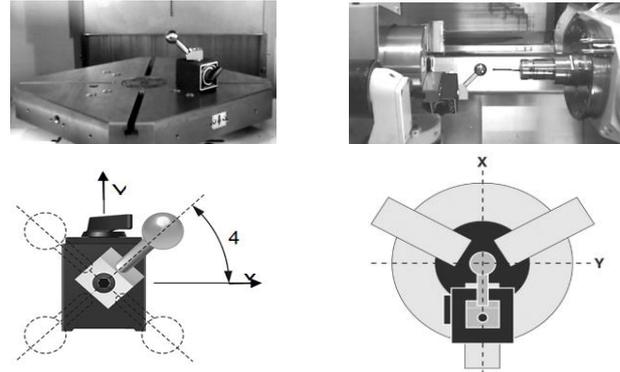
AxiSet™ Check-Up by Renishaw during C-axis calibration: a) on a mill, b) on a lathe, c) mounting the ball on a mill, d) mounting the ball on a lathe [16]
